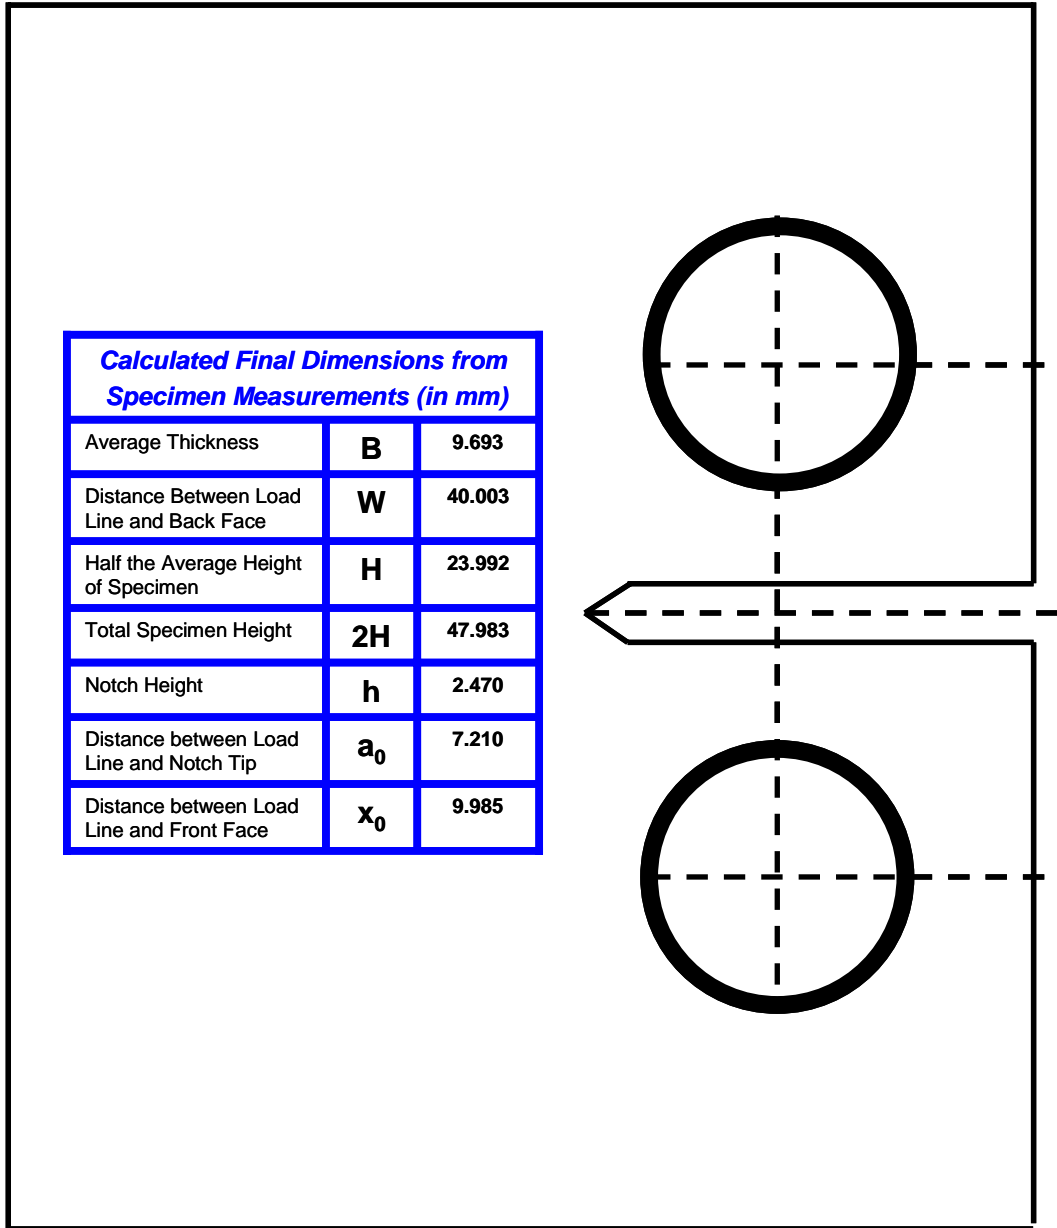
Geometry for 4 Compact Tension (CT) fatigue crack growth specimens with 48 mm total height, 10 mm thickness, and 40 mm load line to back face distance. Final dimensions for the last of the 4 specimens are shown as calculated from measurements performed with a Mitutoyo machinist microscope and then were used in fatigue crack growth analysis.
